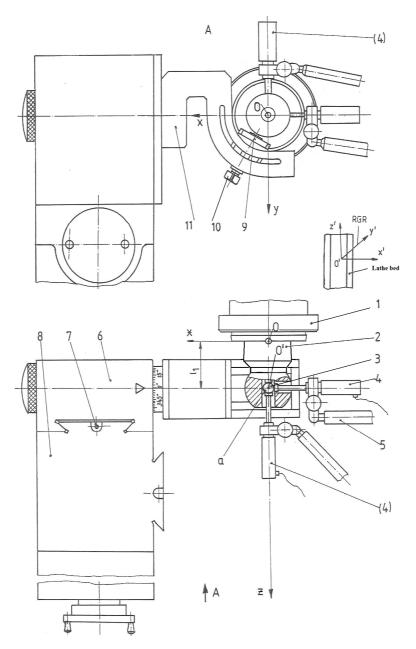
Experimental equipment for measuring static rigidity of MSA for engine lathe SNA 500.
